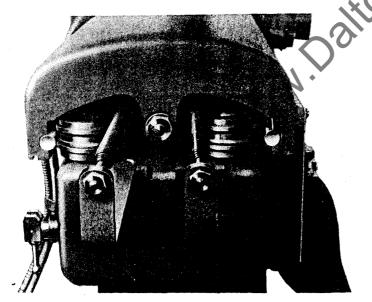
DIAGRAM SHOWING CARRIAGE ROLLER MOUNTING.
